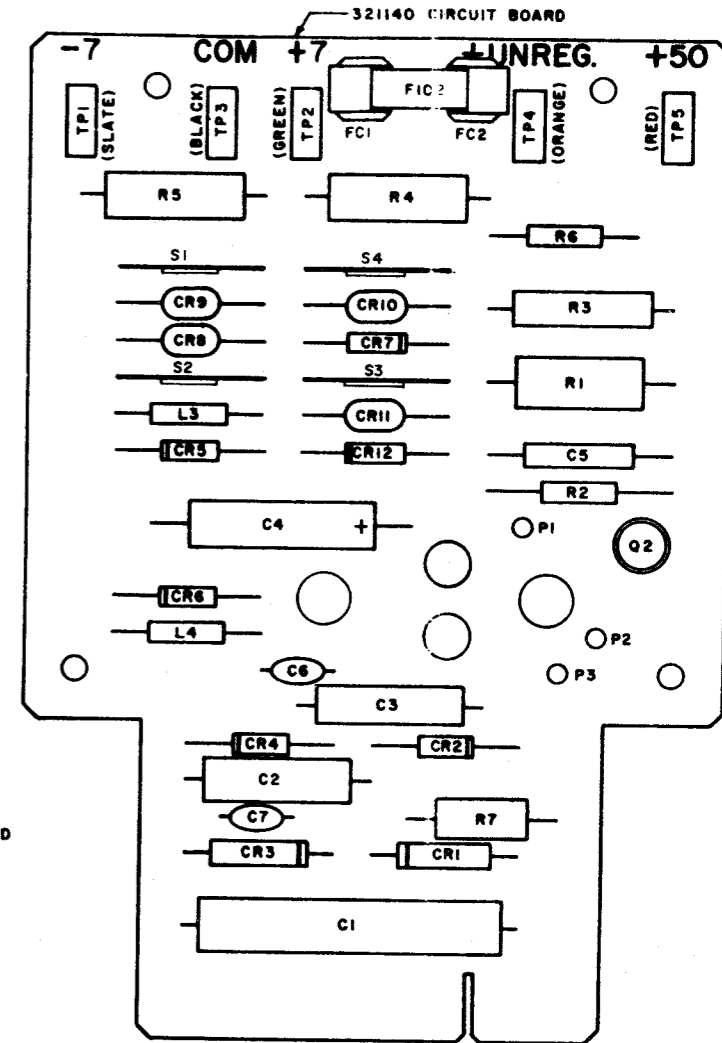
321290 Circuit Board Assembly w/Heat Sink (Sheet 1 of 2)
